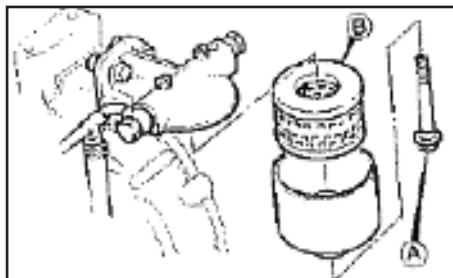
Changing fuel filter element. The centre bolt (A) of the filter assembly,
